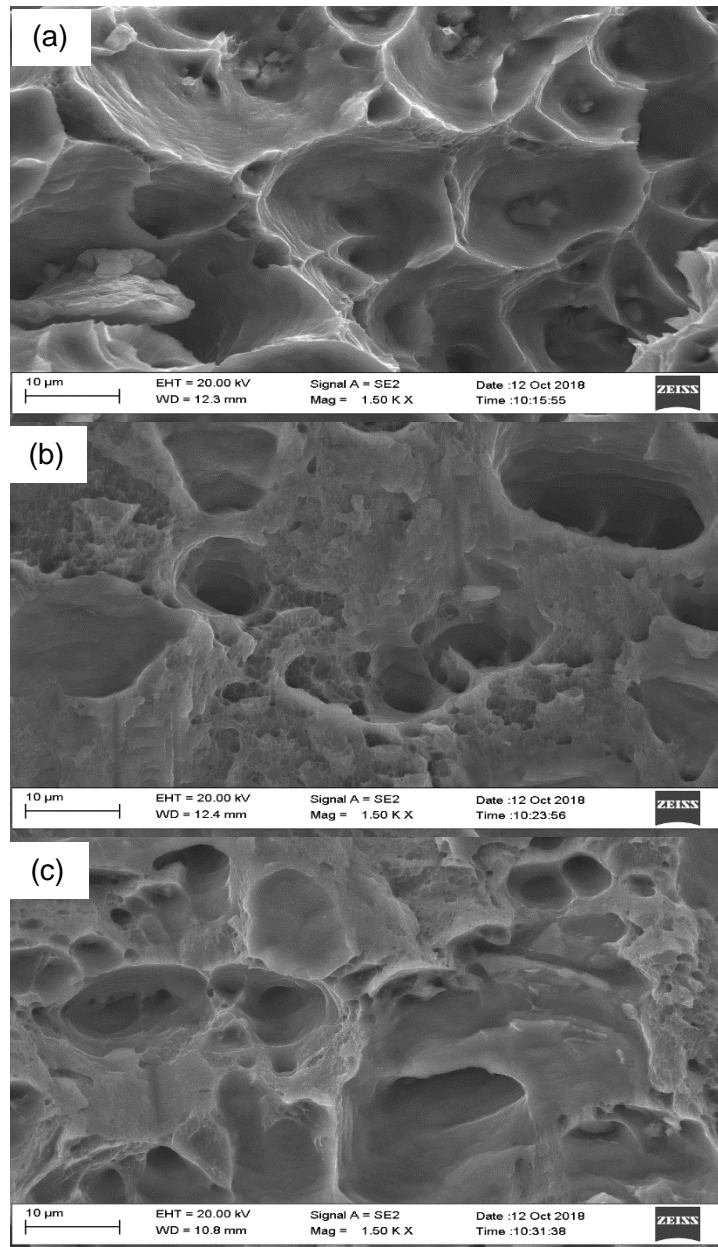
SEM fractographs at the end of the weld for specimens (a) E4, (b) E5 and (c) E6
